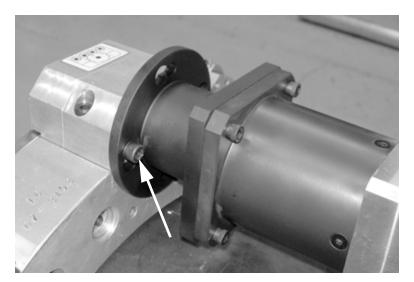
Insert the mounting screws and turn the drive to engage them in the slots. Tighten the screws (one each side).
